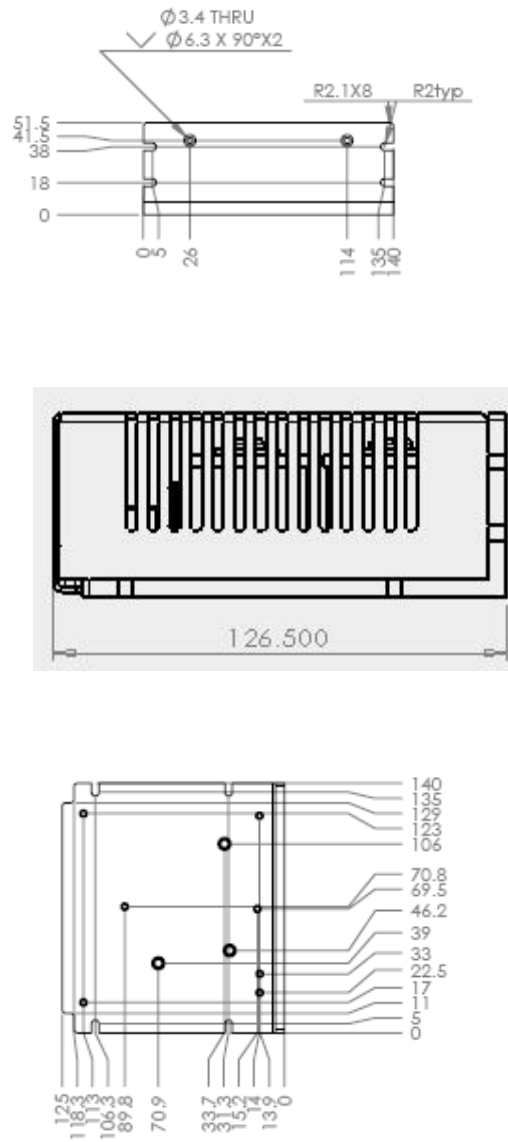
MC4U-MF-560V Motor Filter External Dimensions
